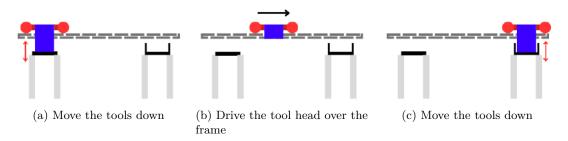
Side view of concept M4. The parts of the concept are depicted in red, carrying a blue tool head
